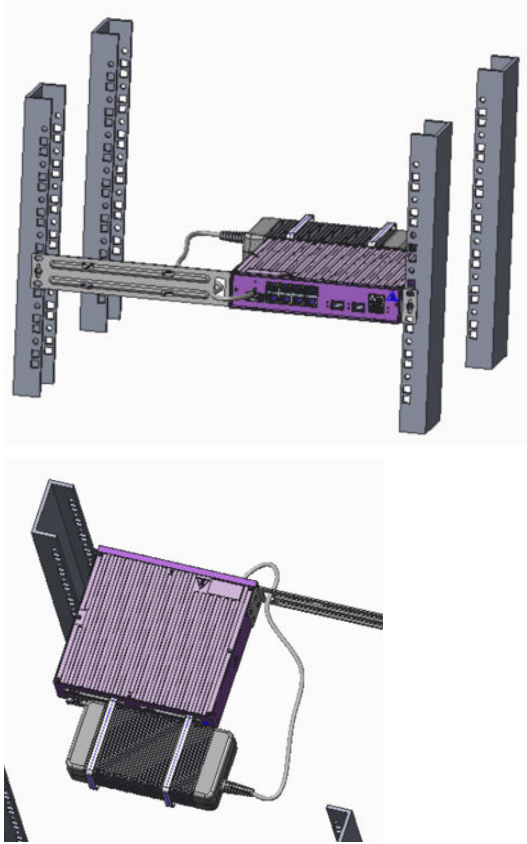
V300-8P-2X Single Rack Mounting with PSU
